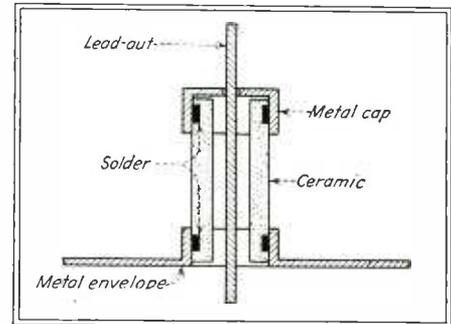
A metal-ceramic-solder joint made without metallizing the ceramic
